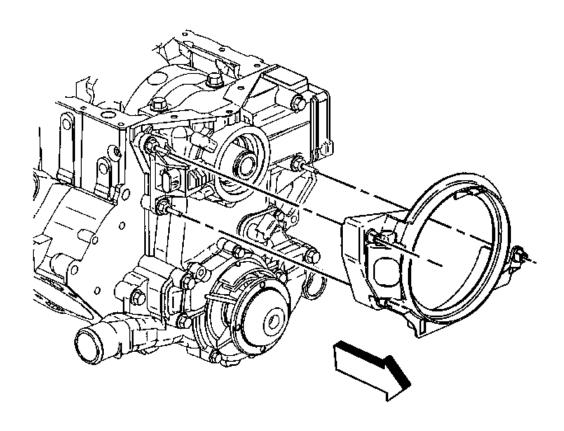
Crankshaft Position Sensor Shield Courtesy of GENERAL MOTORS CORP.
